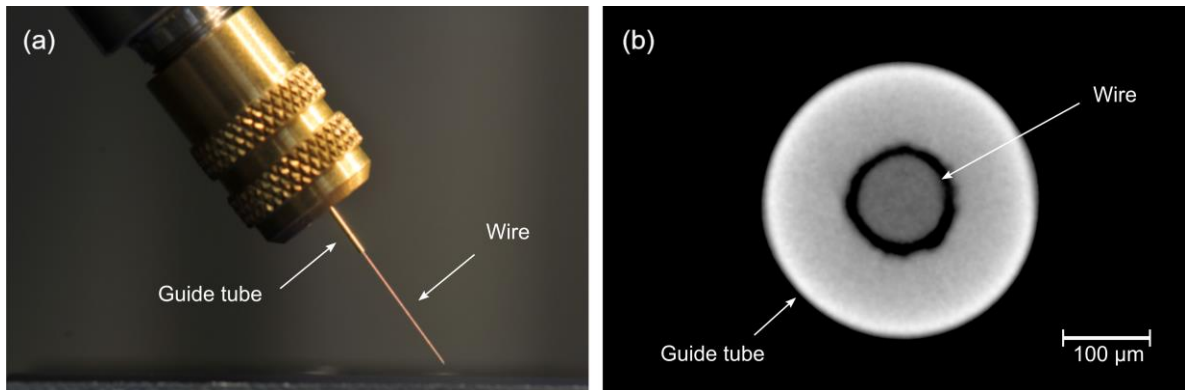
(a) Detail of a wire feed drive with guide tube and straightened fine wire; (b) cross section of the guide tube and the fine wire within (SEM image).
